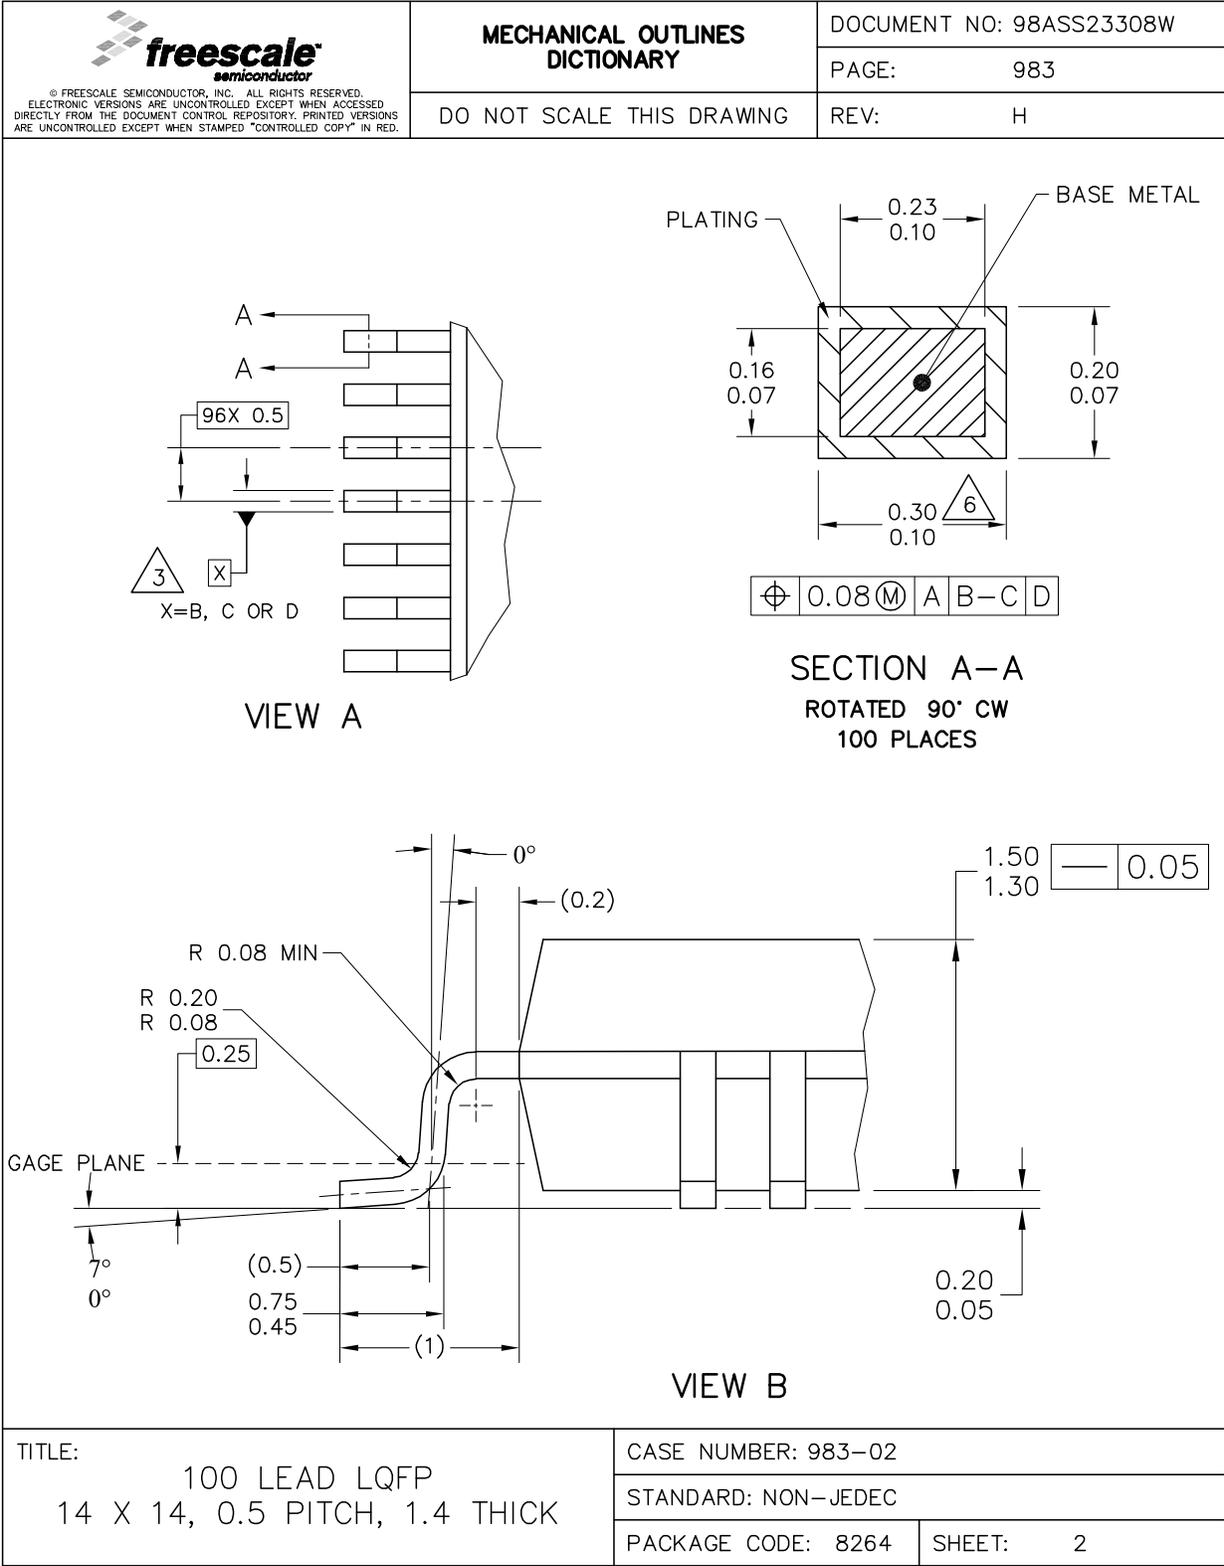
100 LQFP package mechanical drawing (2 of 3)
